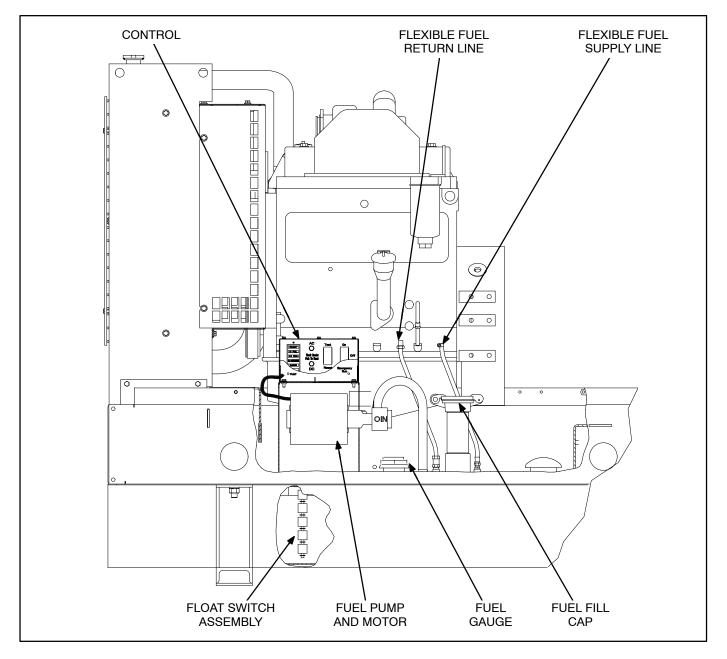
TYPICAL SUB-BASE INSTALLATION
